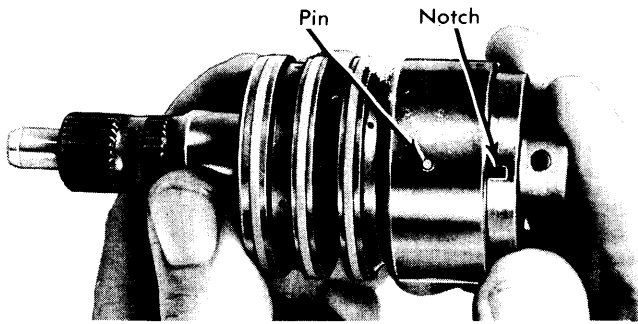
Aligning Pin and Notch for Input (Stub) Shaft
